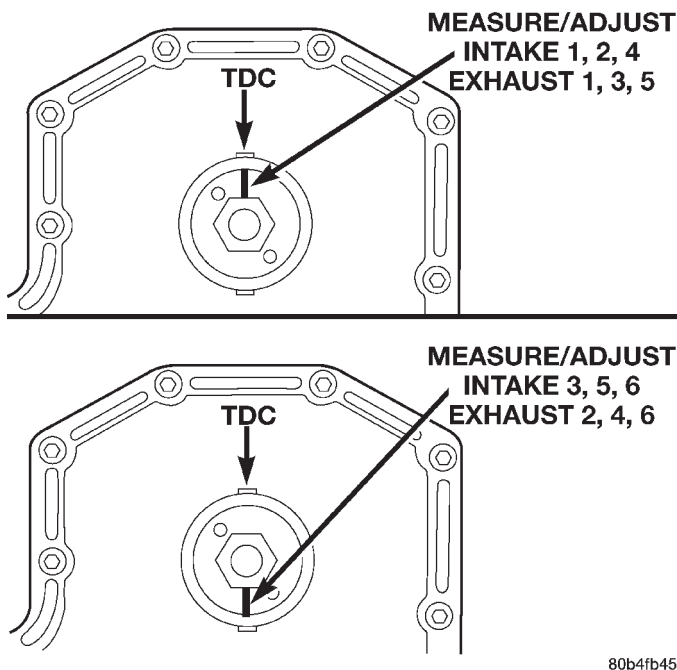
Fuel Pump Gear Timing Mark Orientation
